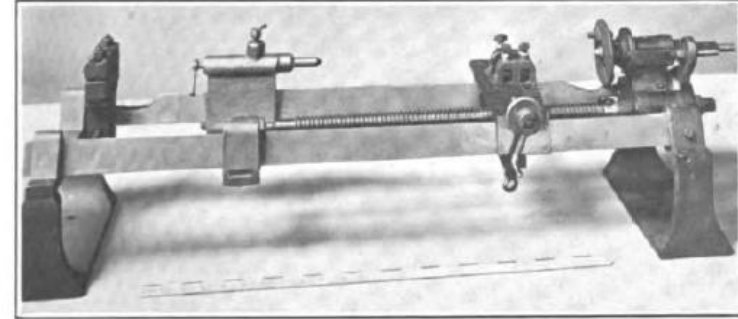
MAUDSLAY'S SCREW-CUTTING LATHE
